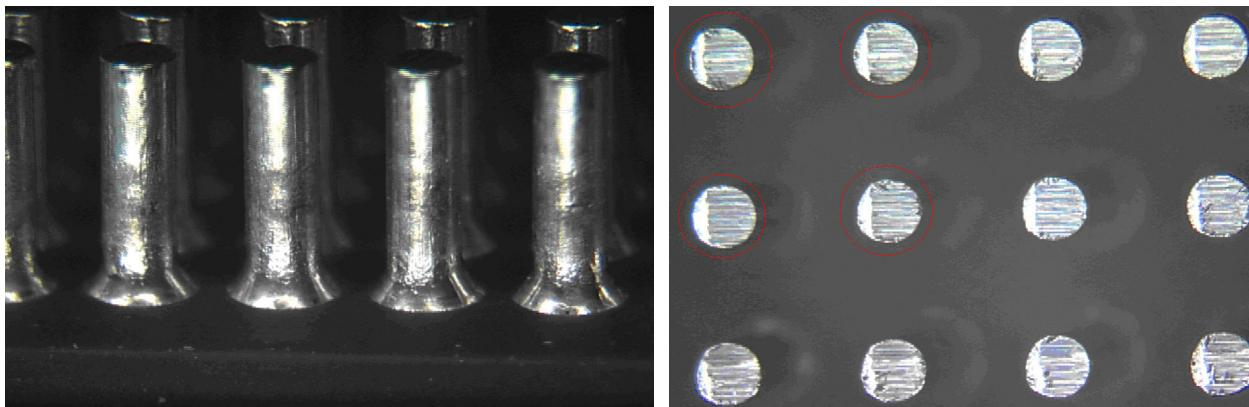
• 90Pb/10Sn Column Side View and Tip View, with 20 mils Diameter
